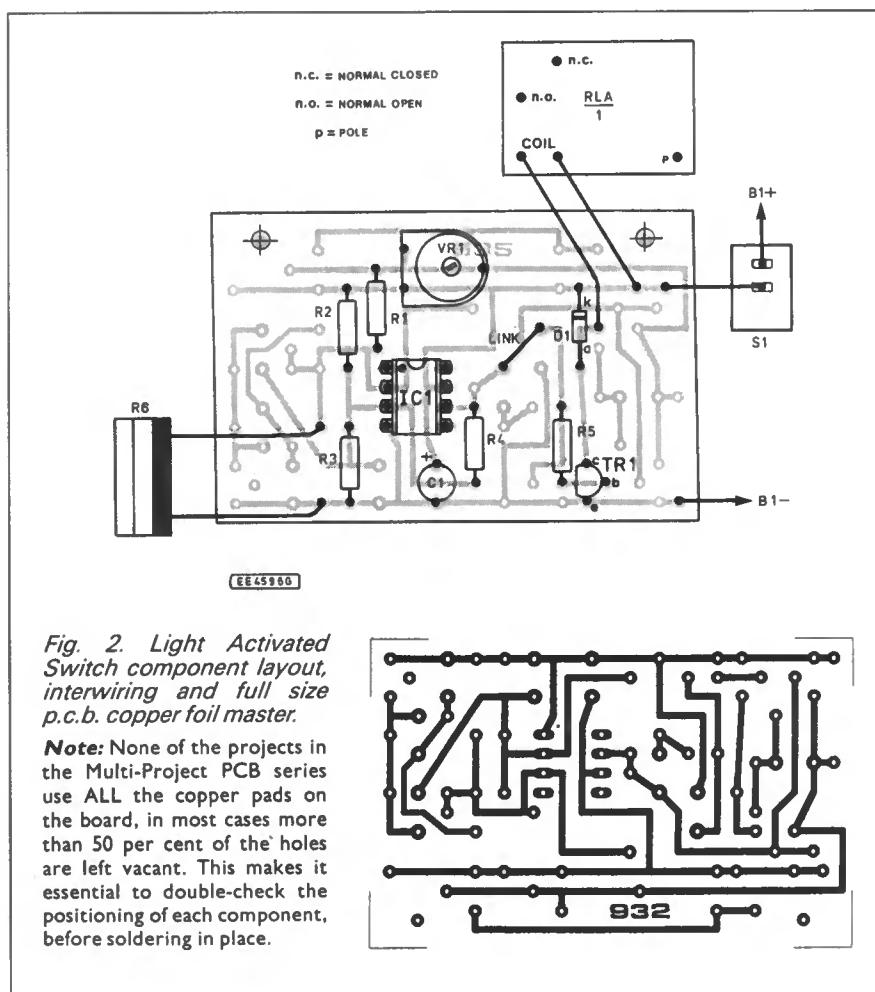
Light Activated Switch component layout, interwiring and full size p.c.b. copper foil master.
